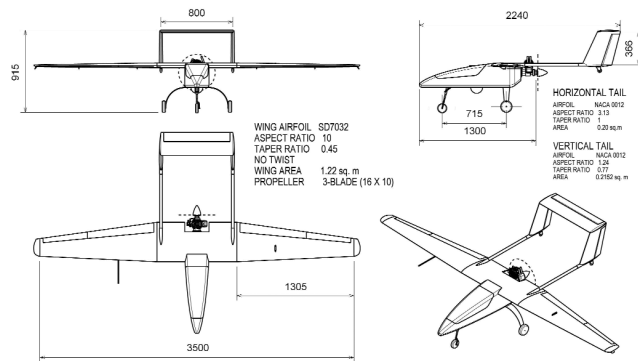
Schematic drawings showing general layout and dimensions of SP-80.
